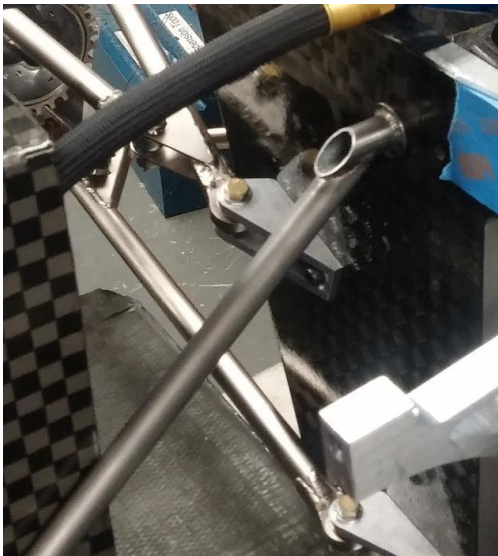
Linkage tube as installed on the car, after having extra chassis tube removed with angle grinder.
